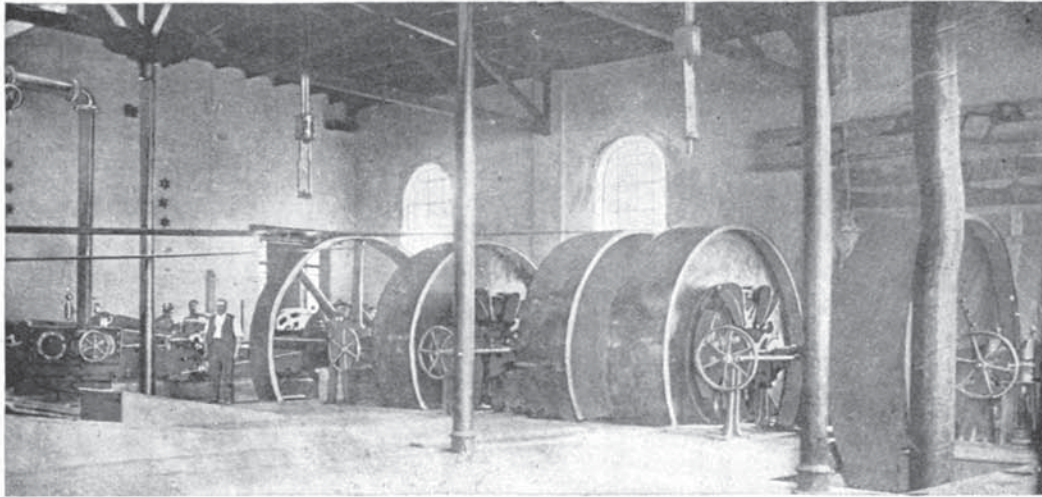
DRIVING SHAFT AND CLUTCH PULLEYS INSTALLED BY FALLS RIVET & MACHINE CO.—COLUMBUS POWER STATION.
